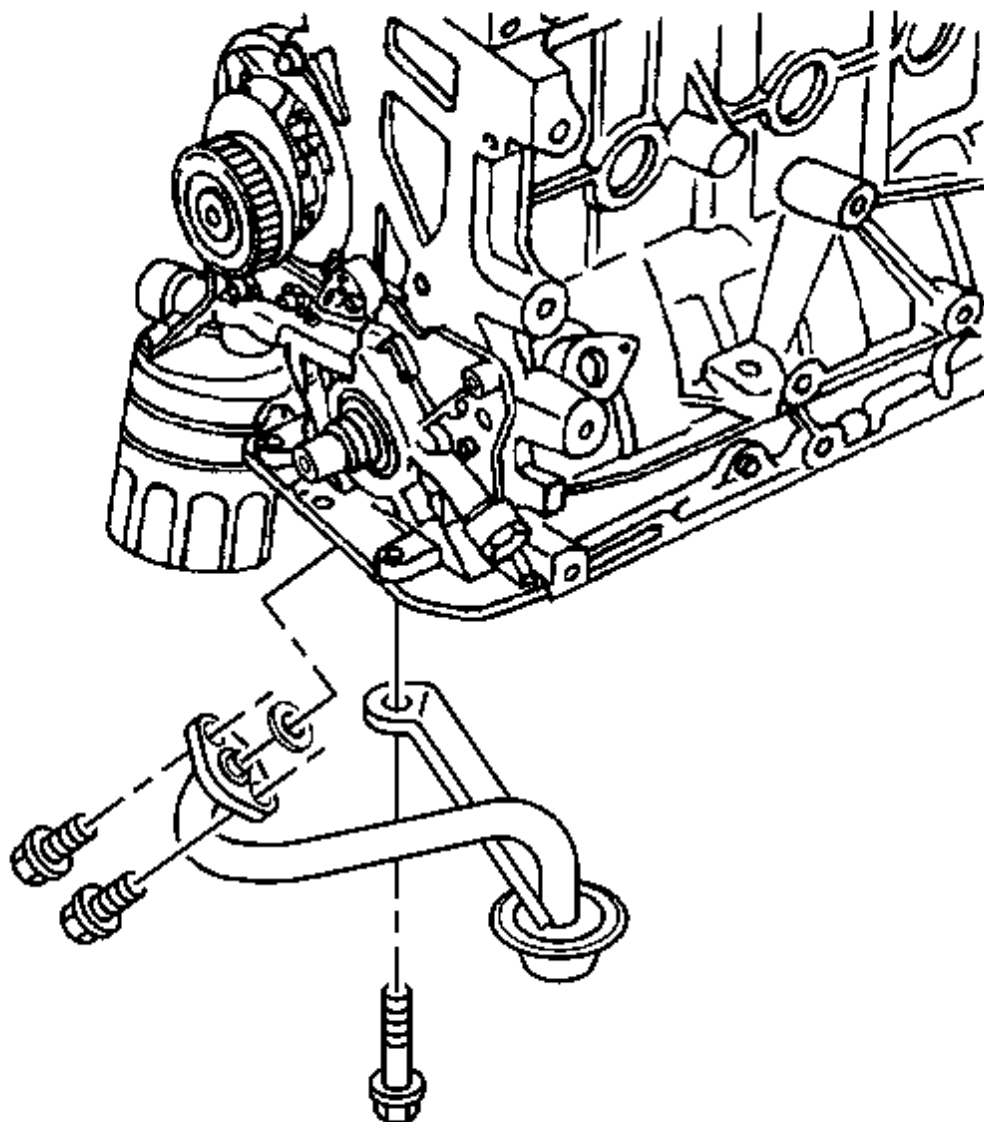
View Of Oil Pump Pickup Tube, Support Bracket And Bolts
